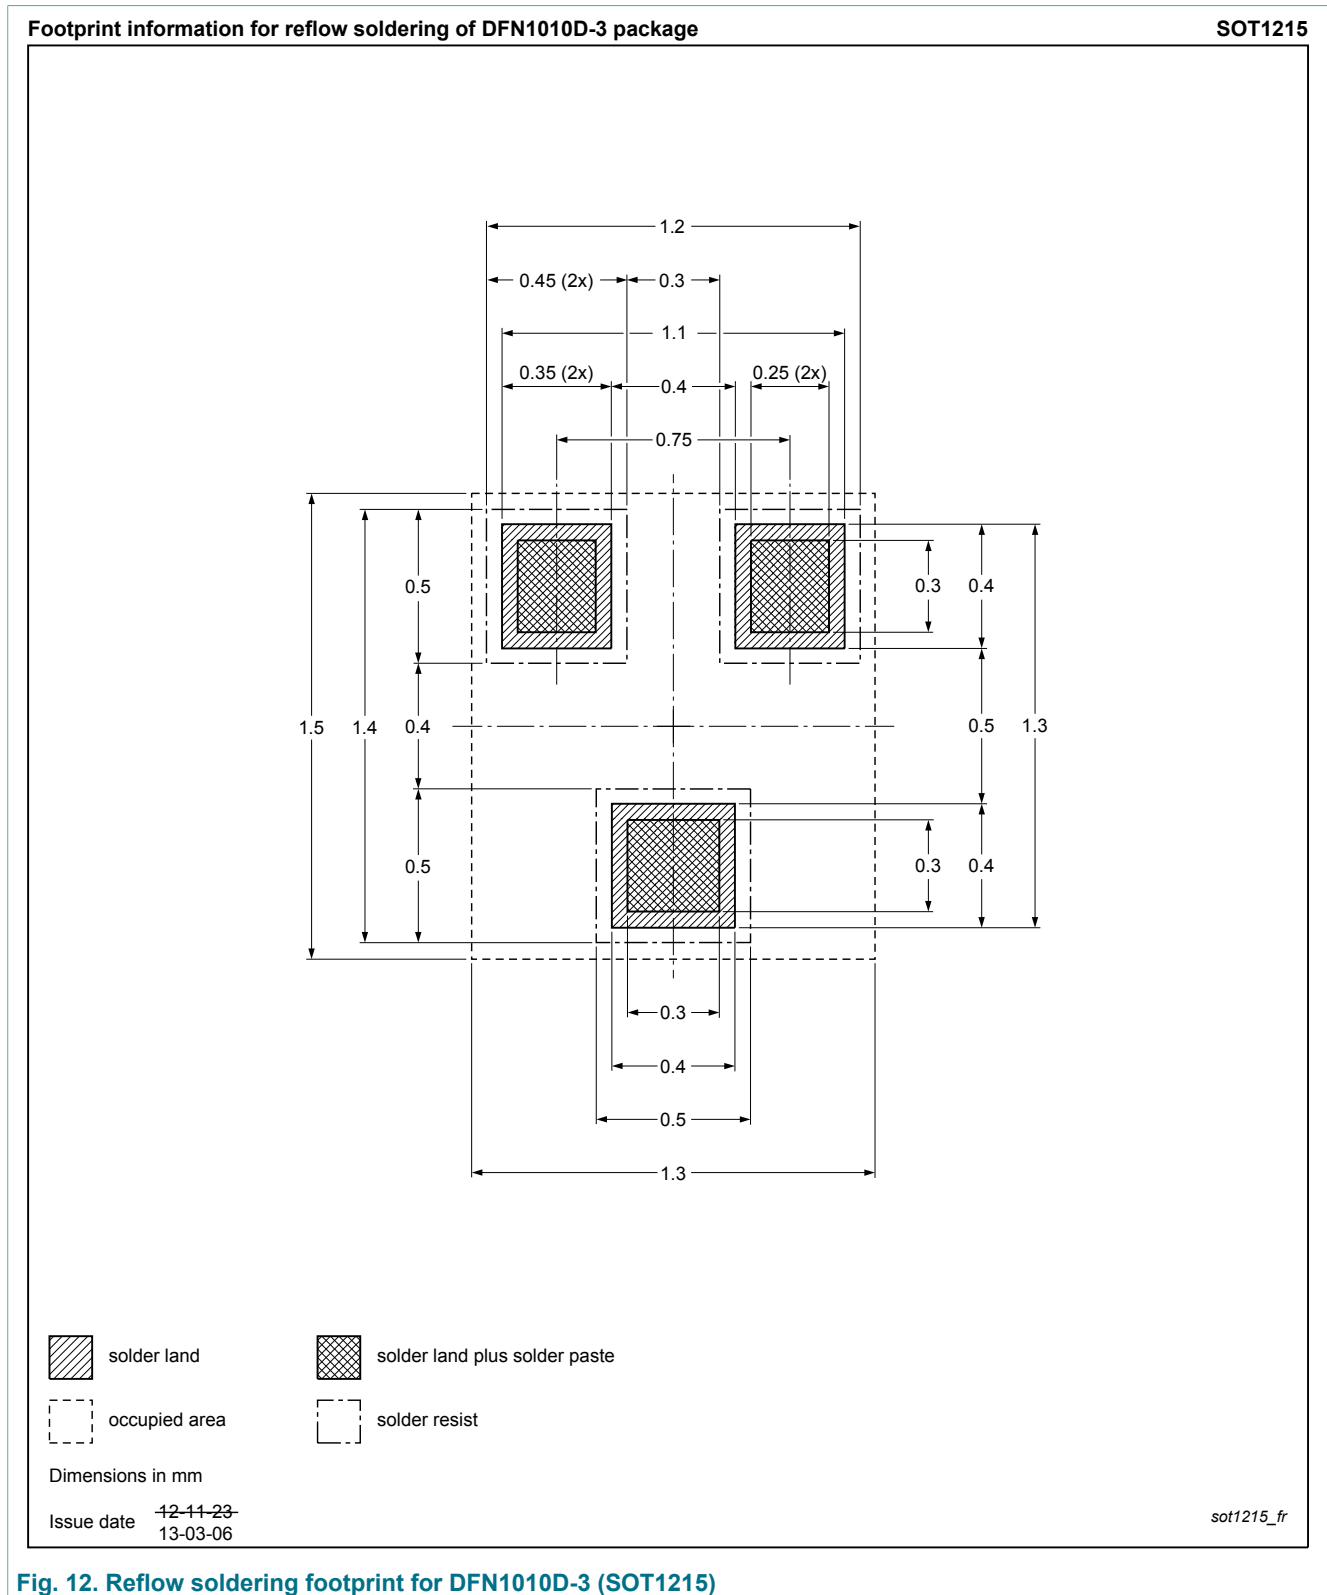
Reflow soldering footprint for DFN1010D-3 (SOT1215)
